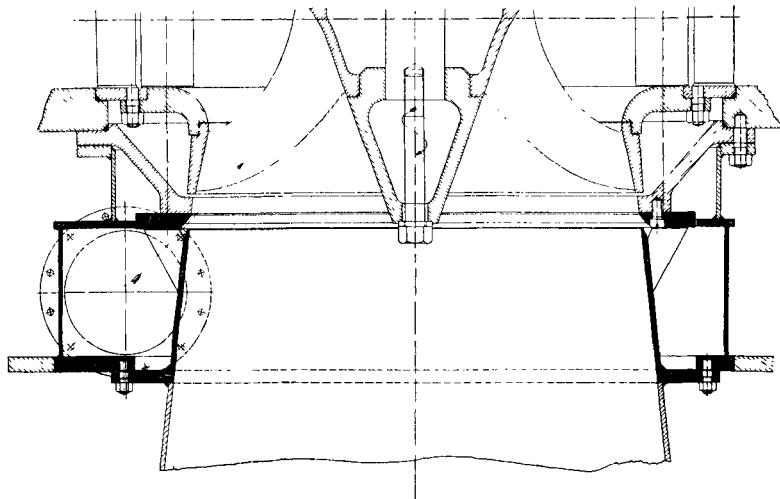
Vertical Shaft Arrangement of Hydraulic Brake
